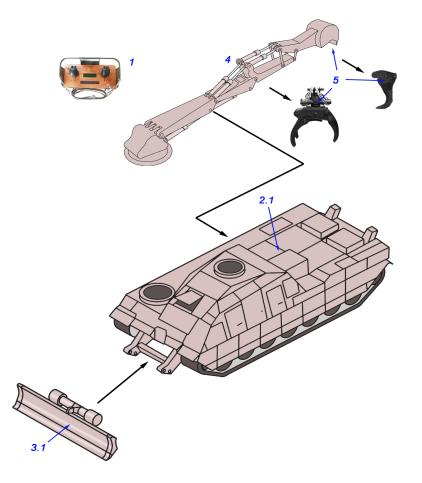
Concept of a recovery vehicle based on T-72 tank 1. Electric control of hydraulic system; 2.1. Hydraulic system; 3.1. Front casting dozer, 4. JIB assembly, 5. JIB attachments: excavator scoop, grabber jaw
